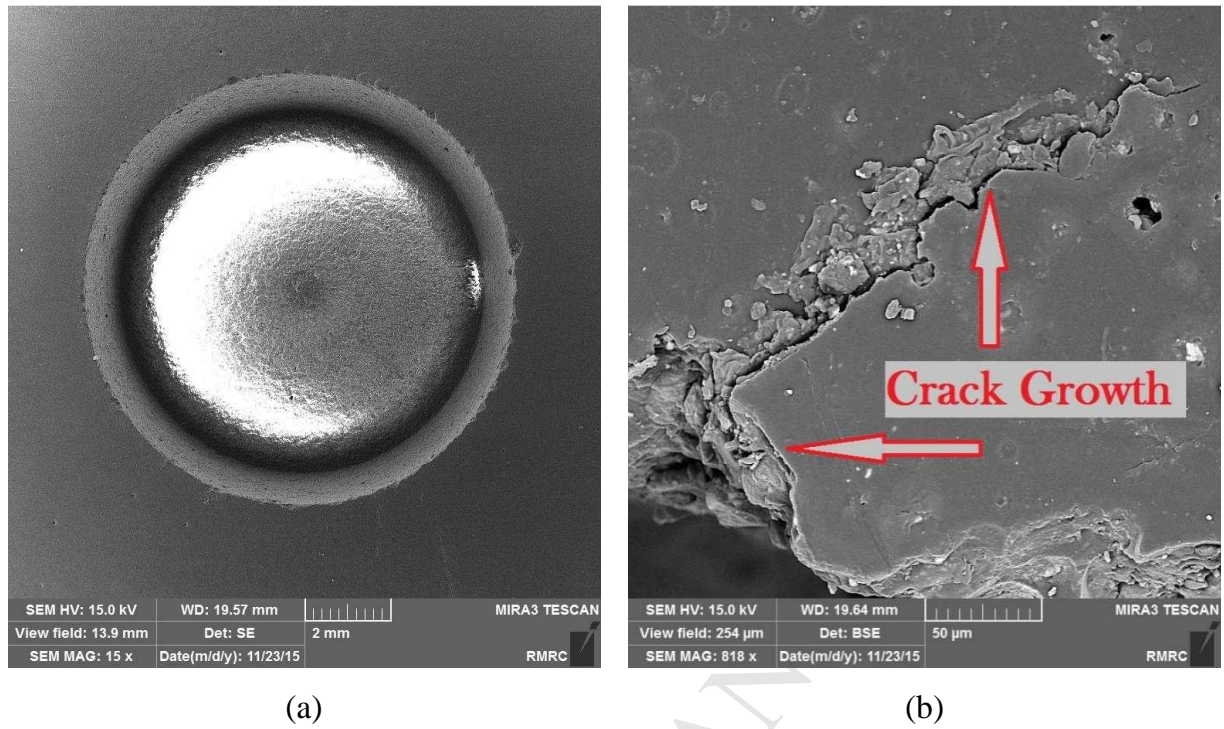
SEM picture of hole (a) and crack growth (b) at damaged samples with the flat end drilling tools before test
